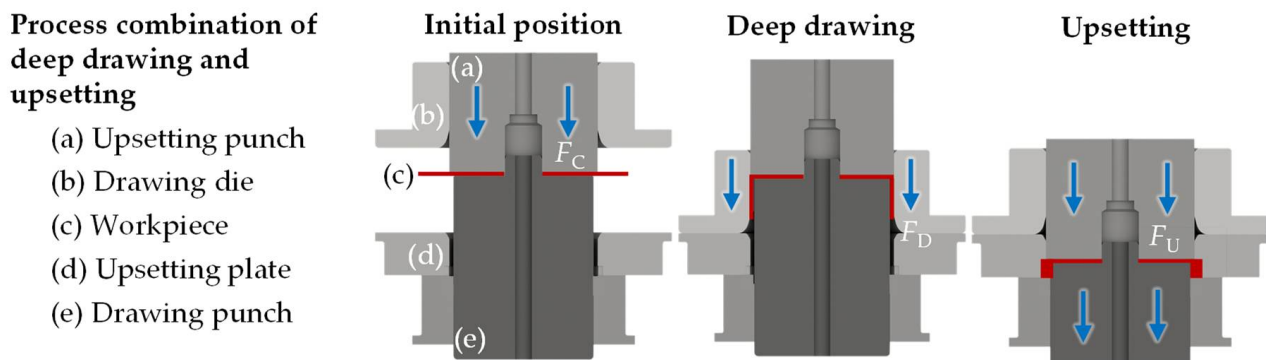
Schematic setup of the combined deep drawing and upsetting process [8].
